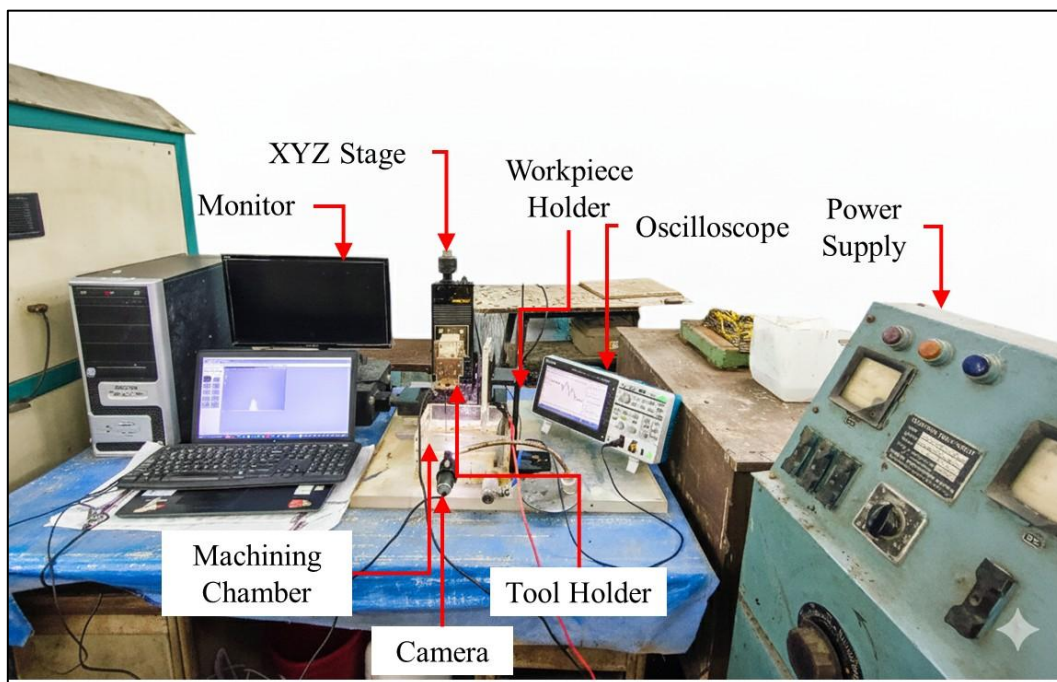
10 Actual image of the indigenously developed integrated ECD milling setup
